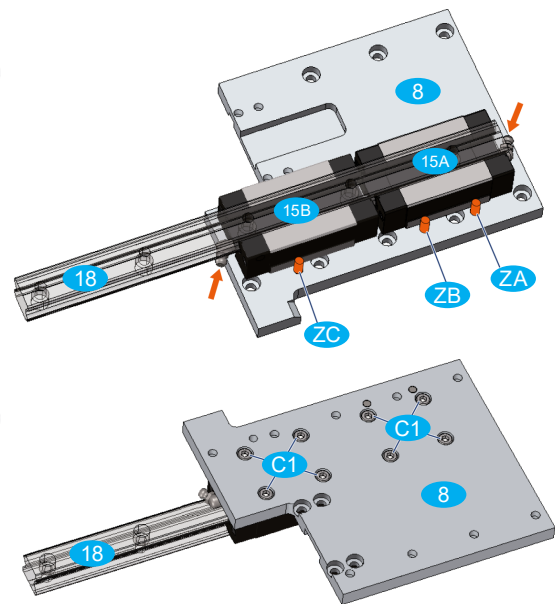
Assembly of the Z-axis carriage. Red arrows show the location of the grease nipples.
